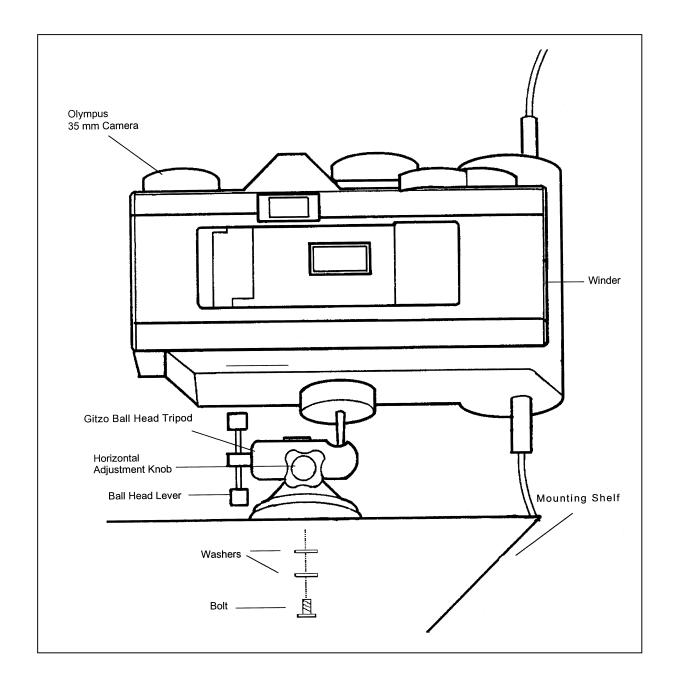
Automatic 35 mm Camera System Tripod Assembly.
